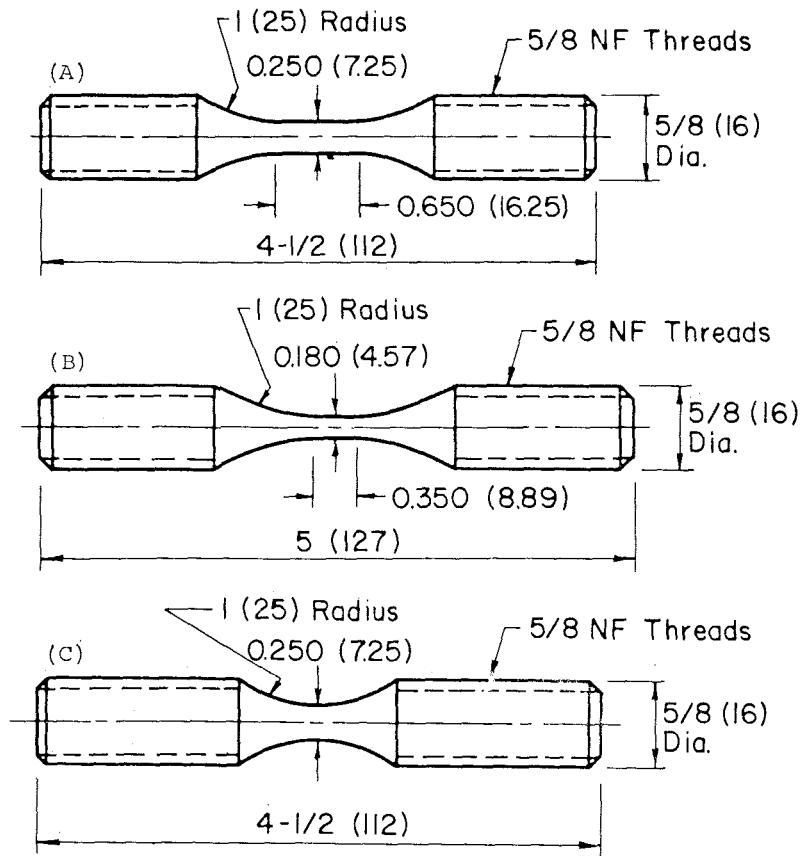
Smooth specimens of A—base metal, B—heat-affected zone, and C—weld metal materials; all dimensions are in inches (mm)
